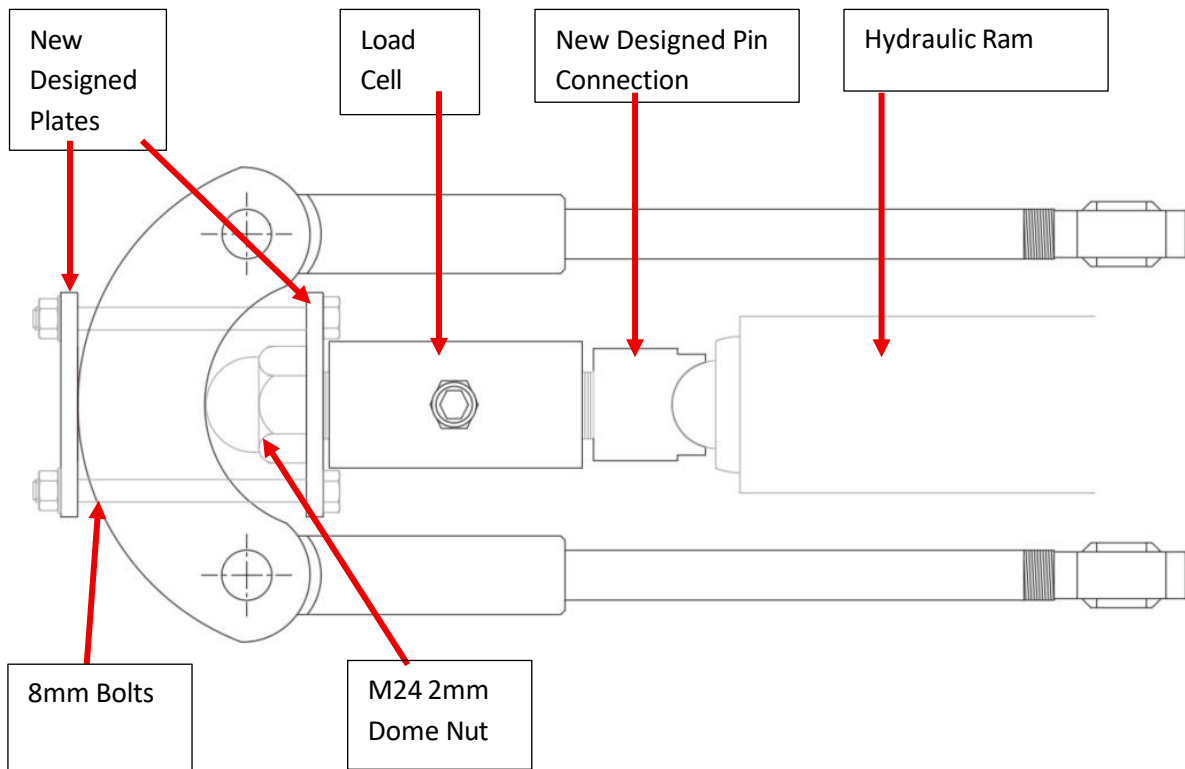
A photo showing the plan view of the complete set-up. This set-up was done for the vertical and horizontal hydraulic rams
